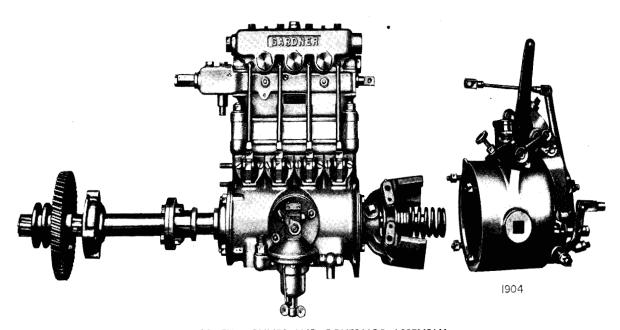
FUEL PUMPS AND GOVERNOR ASSEMBLY
